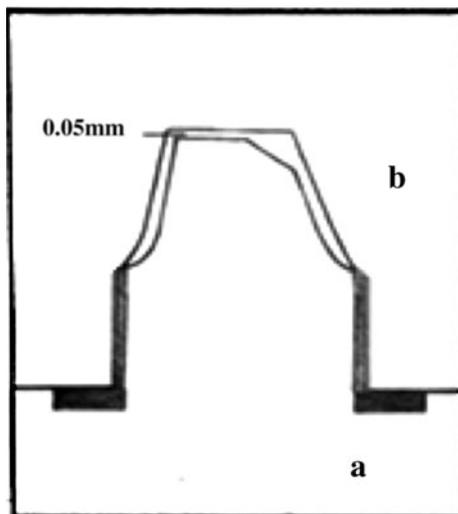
a Line diagram of custom made stainless steel model, b stainless steel former assembly in apposition
